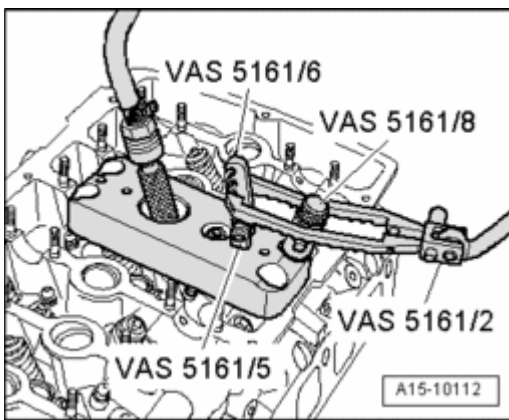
Placing Guide Plate VAS 5161/25 From Valve Keeper Disassembly And Assembly Device VAS
